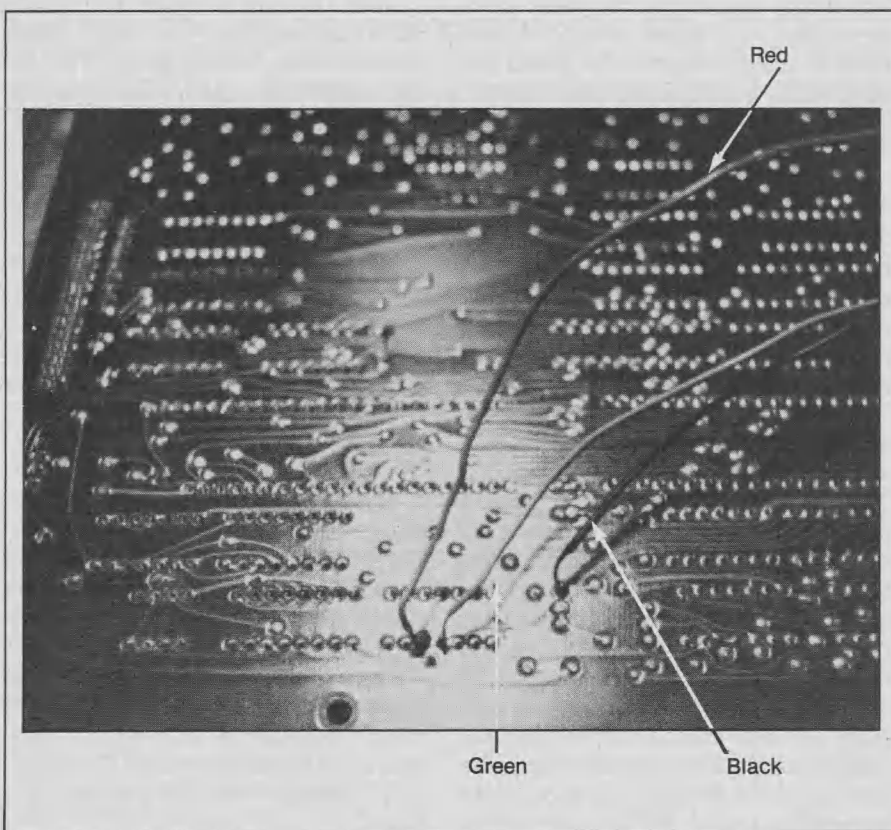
This view of the bottom side of the Kaypro board shows where to solder the wires under U86 and R26.
